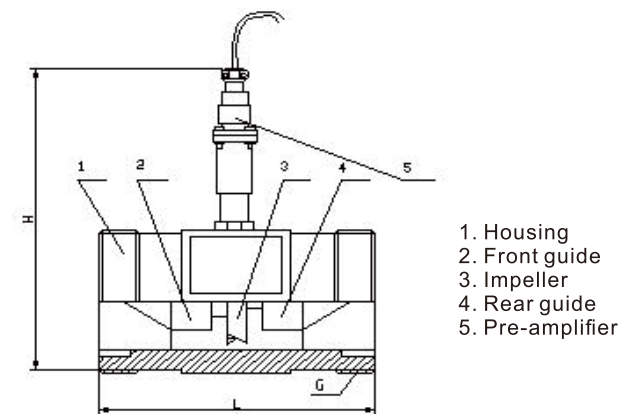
Structural and installation dimension diagram of 15~40 sensors
